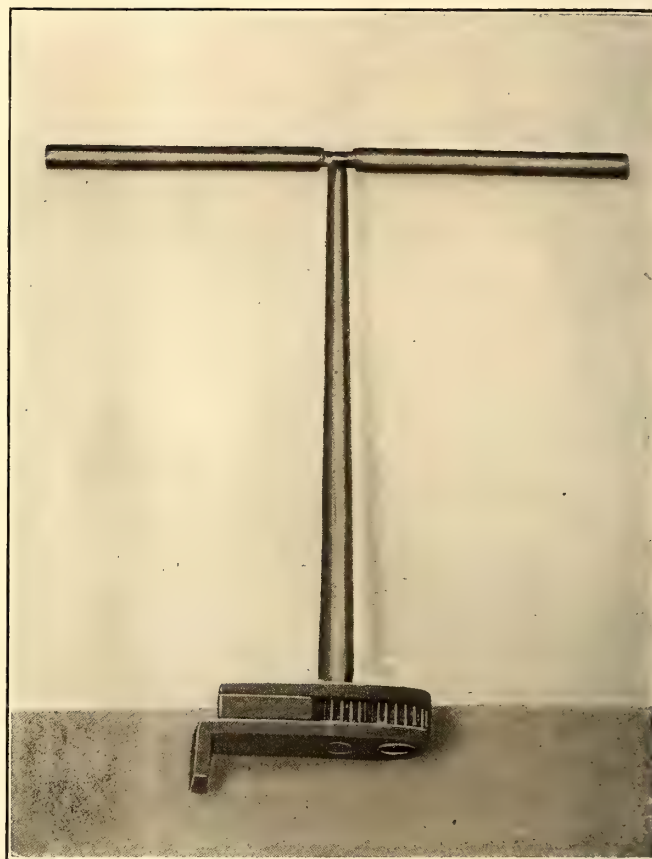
EXTENSION SOCKET WRENCH FOR TIGHTENING NUTS ON SPLIT GEARS
